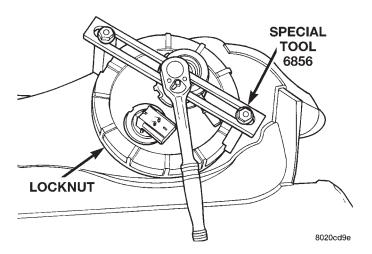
Fuel Reservoir Module Lock Nut Removal
